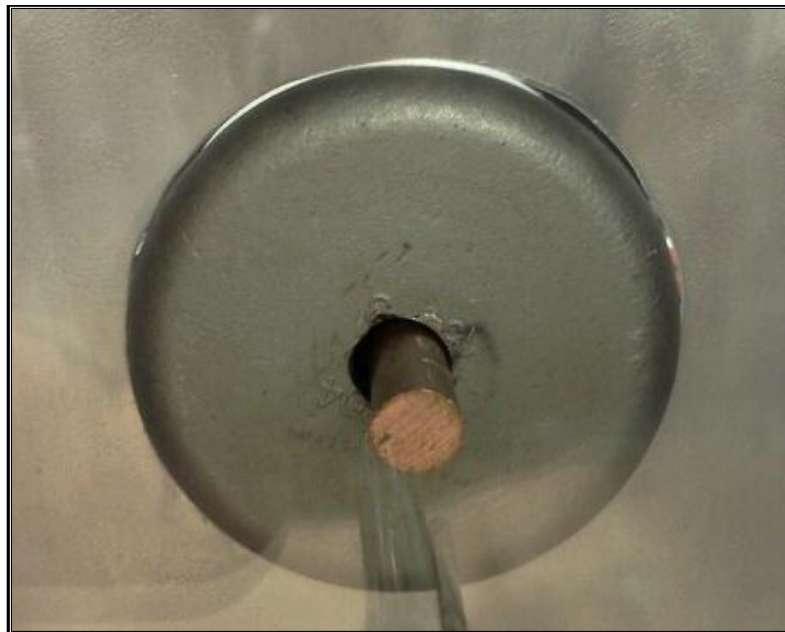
The front insert showing the small clearance available to the heat shield.
